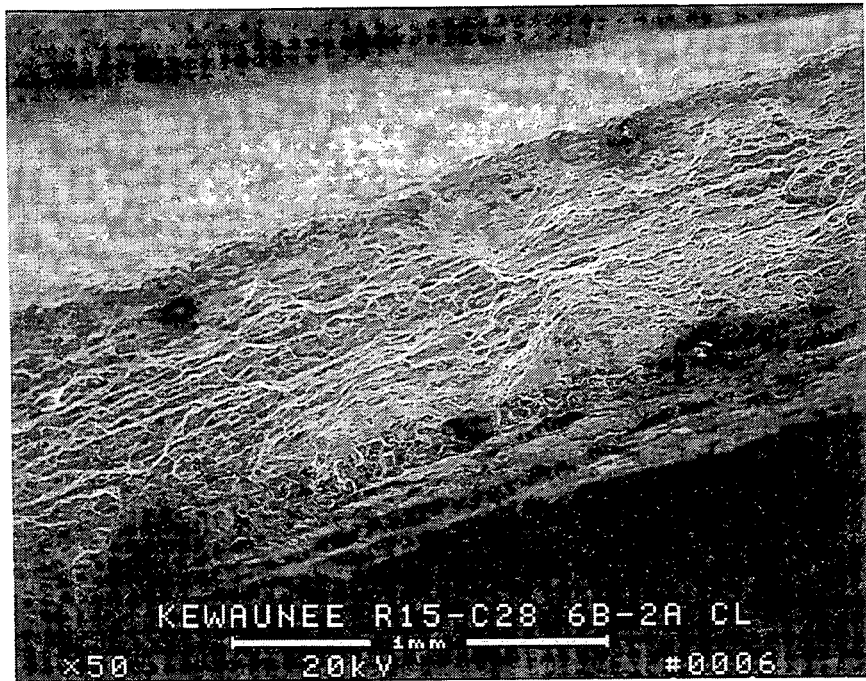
TSP2 crevice region Specimen 6B-2A of Tube R15C28. Area 6 from Figure 4-33 showing the right end of field corrosion cracking on the burst test fracture.
